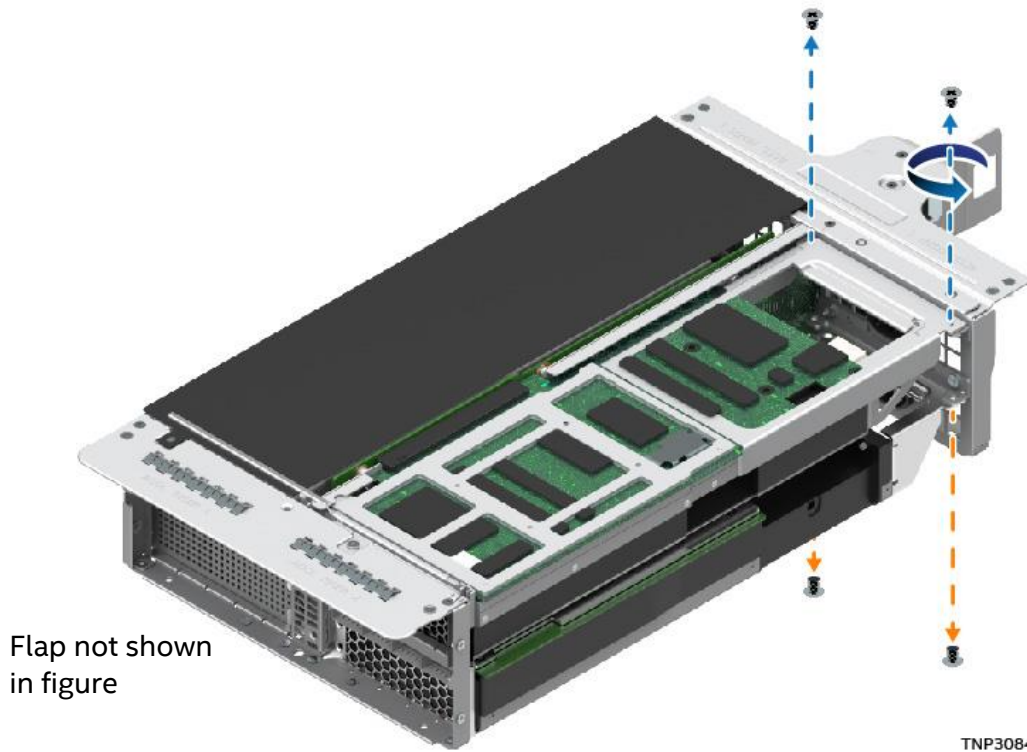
Lifting the Flap up on the Front Side of the Riser Assembly
